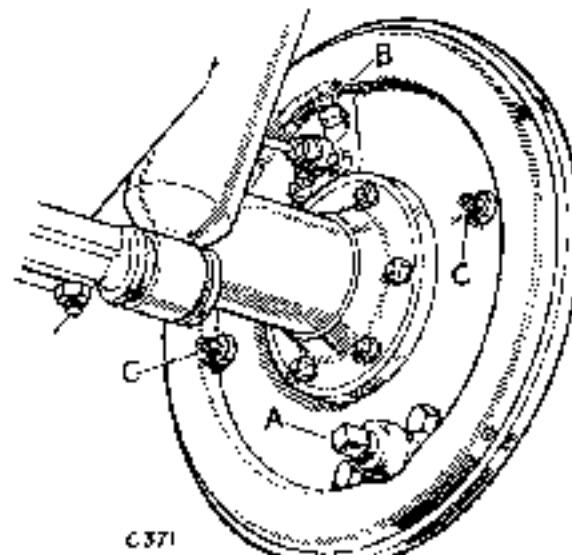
A Wheel brake adjustment: Rear only 11 in brakes
